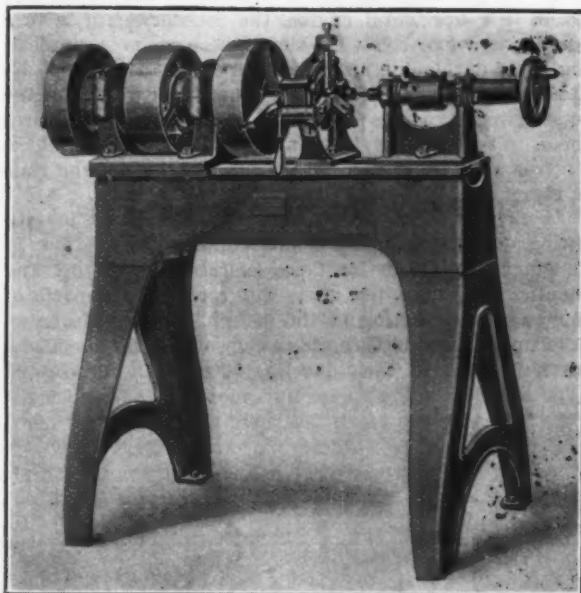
The Hollow Spindle Counter Rotary Climax Centering Lathe.
